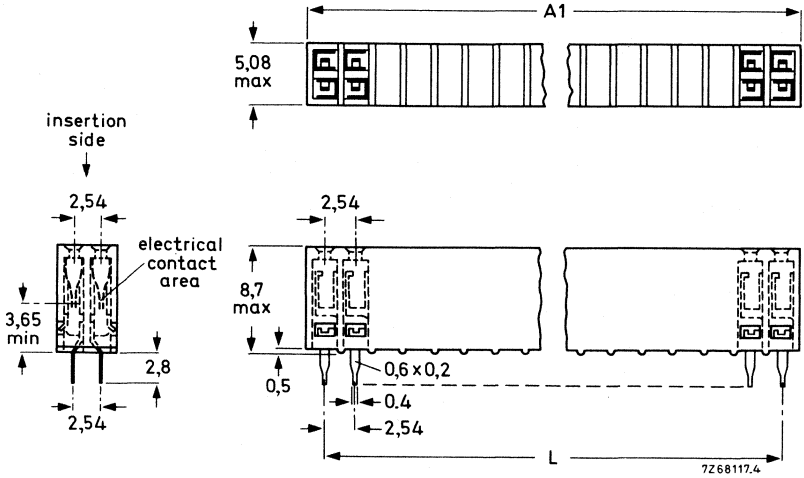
Panel socket, double row. See Table 2 for dimensions A1 and L.
